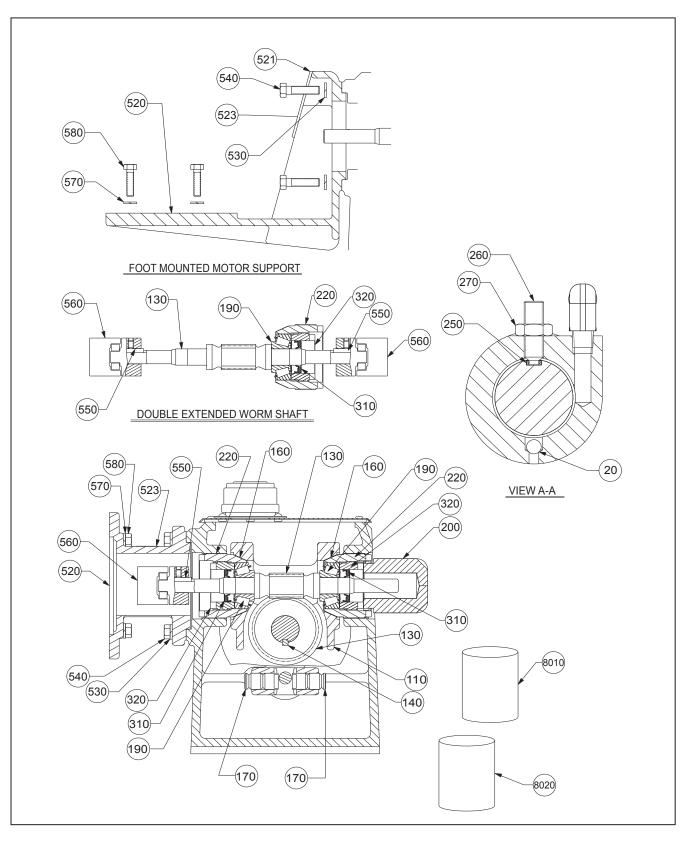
Drive End View (DWG 102-2095-000)(Sheet 1 of 2)
